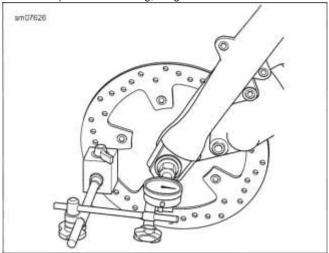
Wheel Bearing Inspection (Front Wheel Shown)
